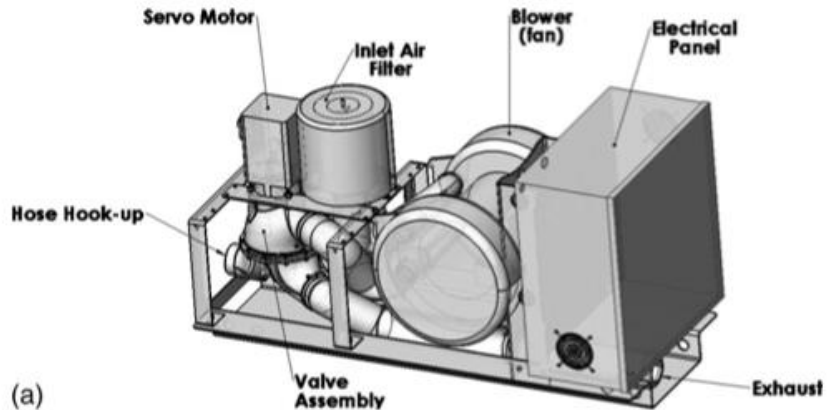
Three-Dimensional assembly drawing of a Pressure Loading Actuator (Kopp et al., 2010).
